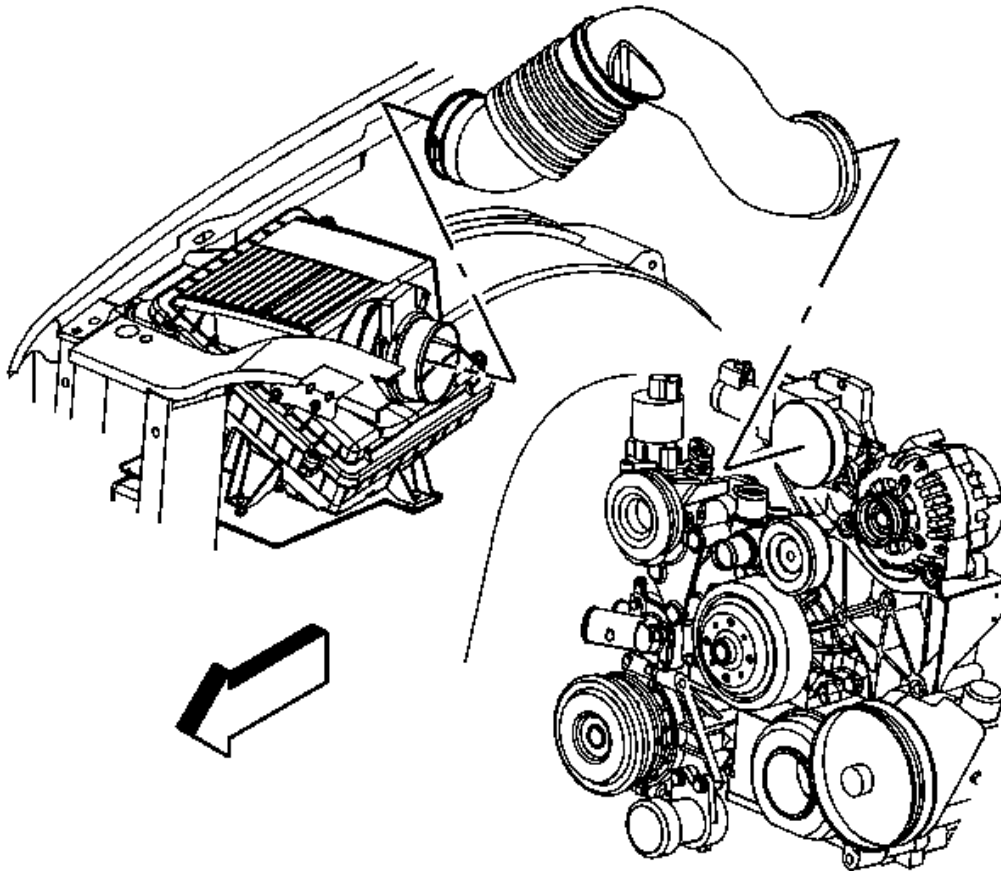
View Of Air Cleaner Outlet Duct (W/HP2 Front)
